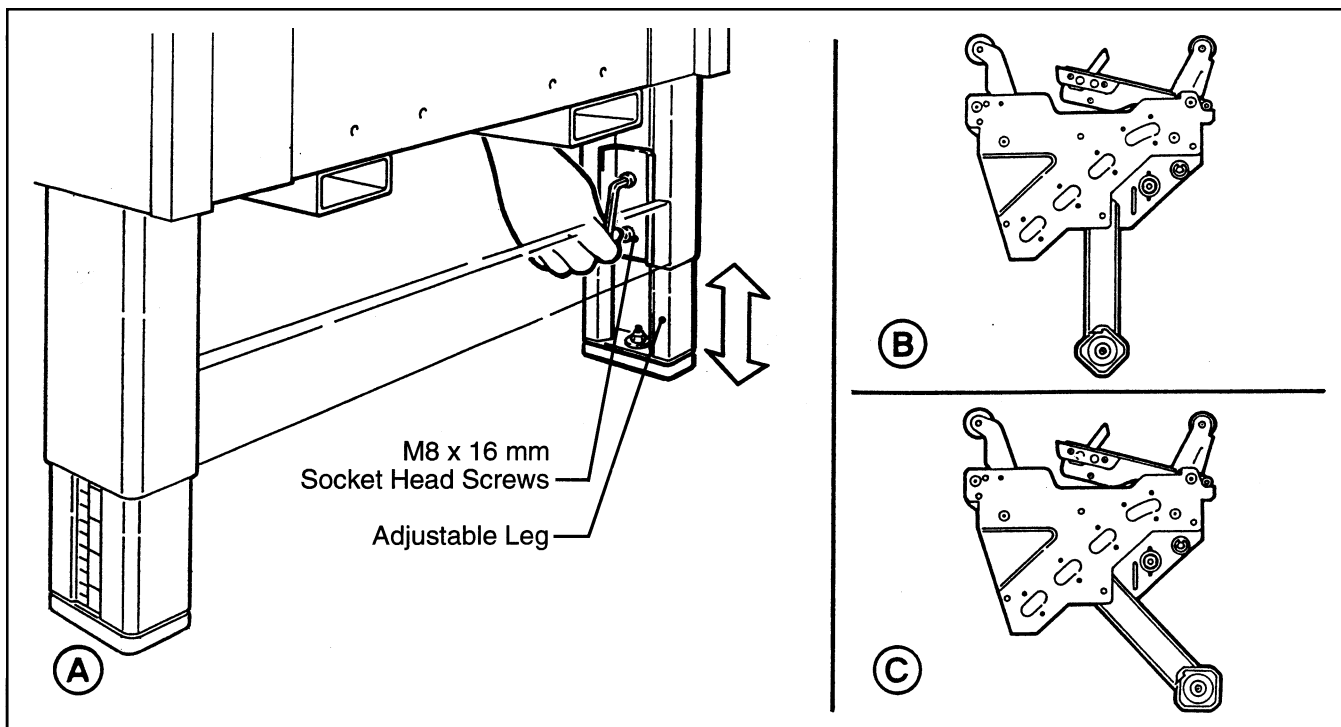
Machine Bed Height Adjustment and Lower Tape Drum Bracket
